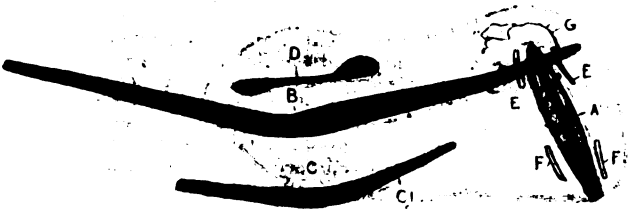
THE PARTS READY FOR ASSEMBLING.
